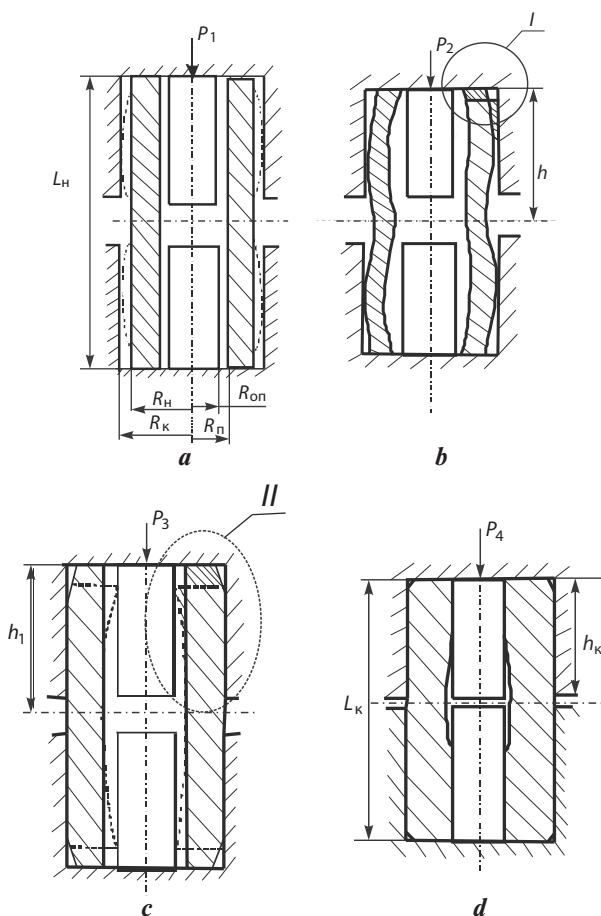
Hot upsetting stages for a bushing-type component: a — free uniform upsetting until touching die impression walls by heated metal; b — filling of die spaces from external surface side of deformed bushing; c — filling of die spaces around plug during hole forming; d — final stage of filling so-called “dead” areas
